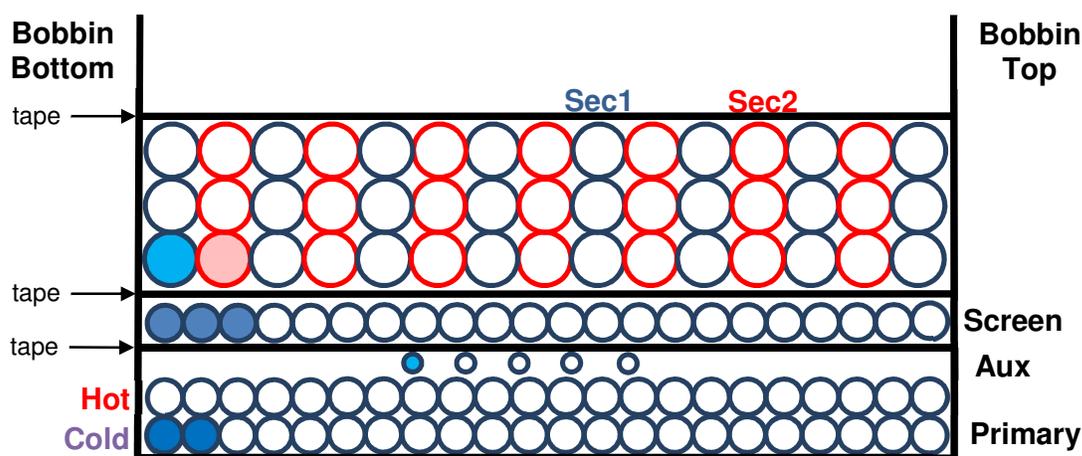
Transformer Winding Arrangement (Vertical Bobbin)
